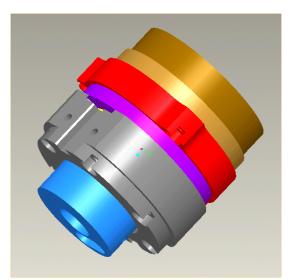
The Kollmorgen motor and Harmonic Drive gearbox.
